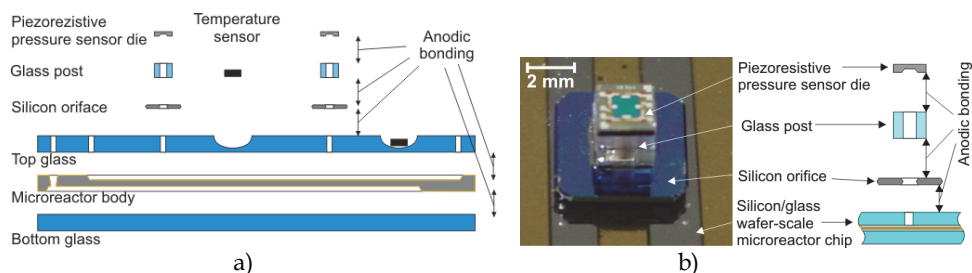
The microreactor chip: a) cross-section of expanded view, b) details of the pressure sensor assembling
